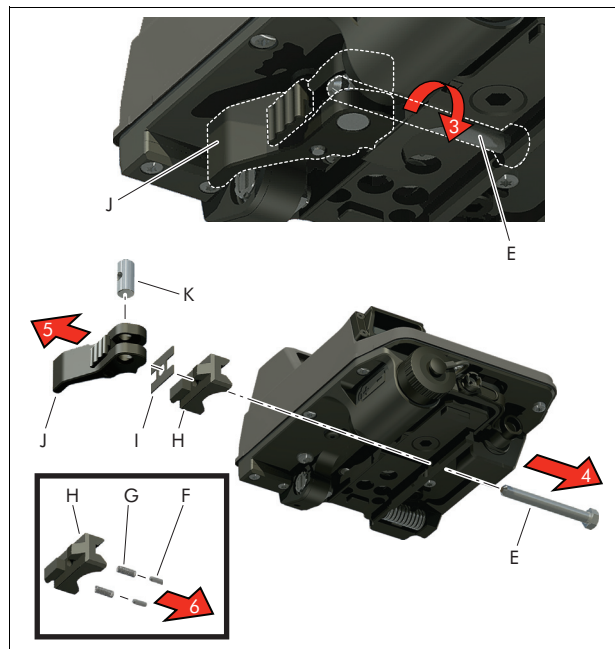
Fig. A.j - Removal of the Picatinny clamp kit (KITP7120)
